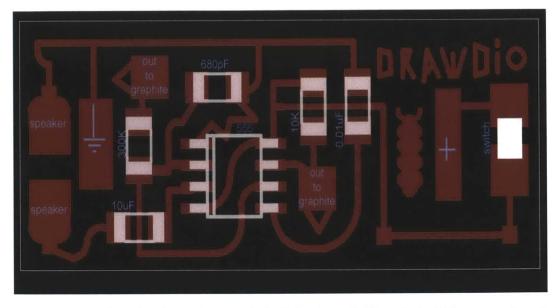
Eagle Board file showing the traces for the first custom-milled Drawdio circuit. You can see the caterpillar drawing left over from before the board got the name Drawdio.
